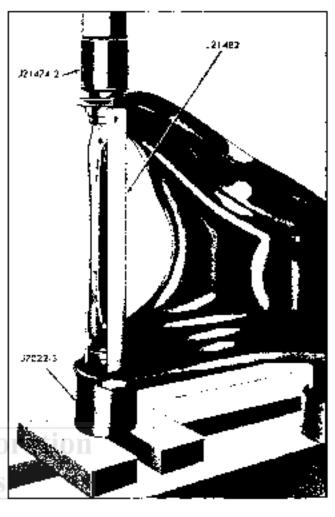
Installing Depar Control Arm Bushing (Firebird)
